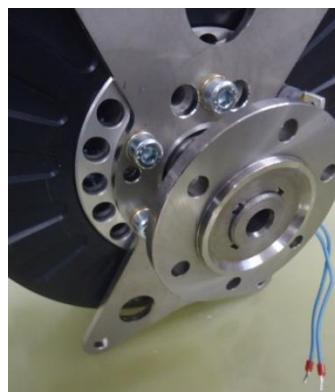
Motor with extended shaft and flanged shaft on the extended shaft (for EMRAX TWIN)
